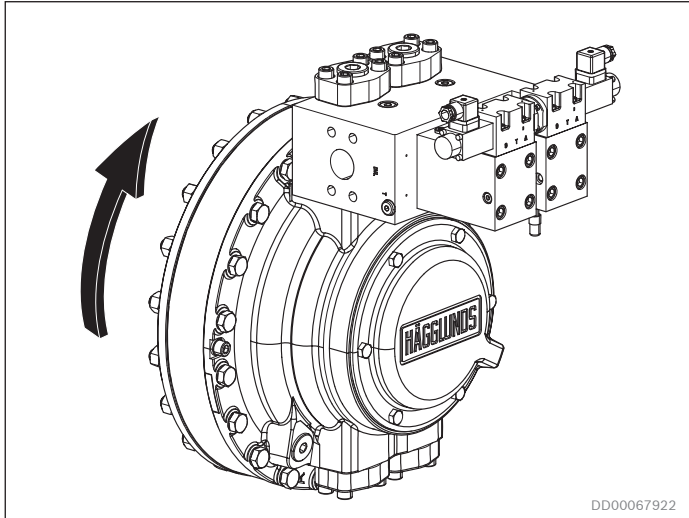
CA valve mounting position for counter clockwise drive shaft rotation as viewed from the motor shaft side. INL port (A) on valve connected to A port on motor
